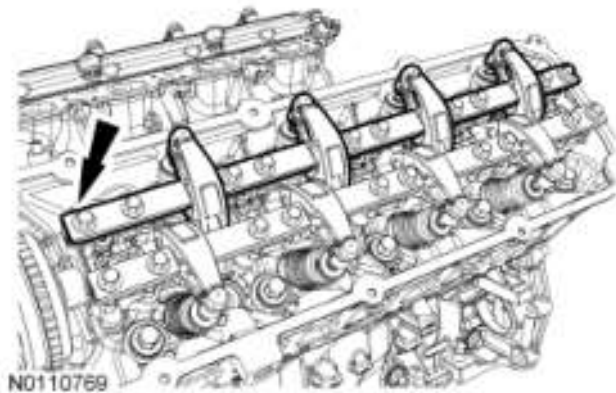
Locating LH Intake Rocker Arm Shaft Assembly
